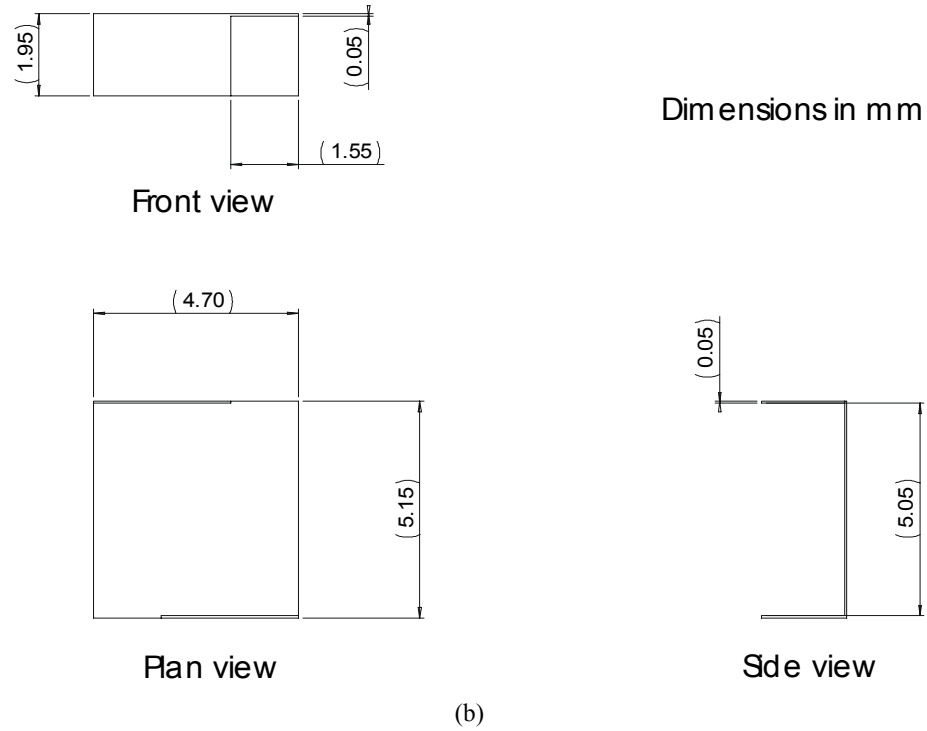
Technical drawings of the narrowband 60 GHz filter
